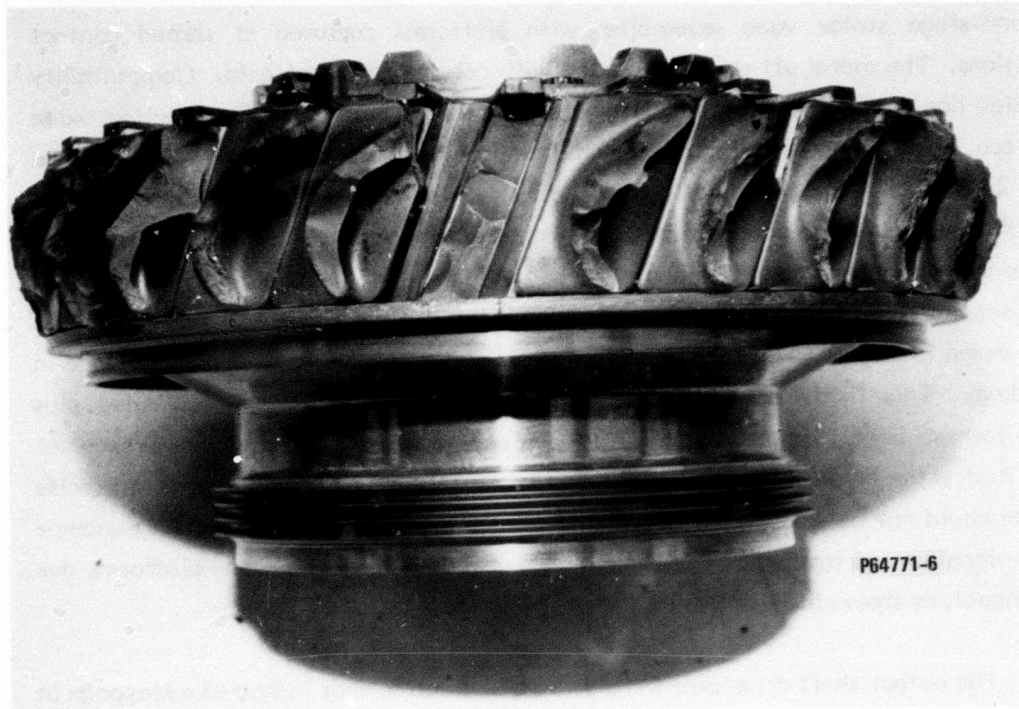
First-Stage Rotor After Engine Test CE001-17 Showing One Blade Fractured Below the Platform and the Rest Fractured by Impact Above the Platform.
